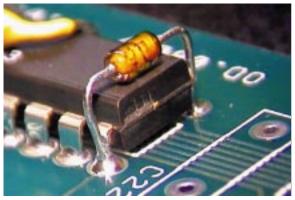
Axial lead component soldered to through hole component leads. Note: Leads of axial component should not be inserted into the plated holes.
